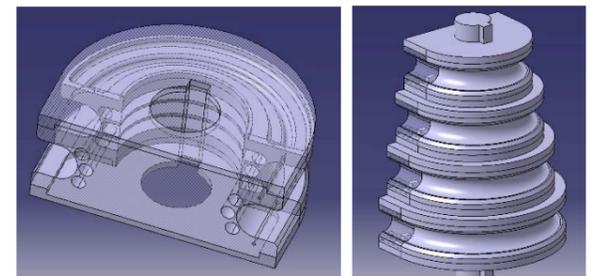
Detailed view of the bending disc (left) and combined bending tower (right)
